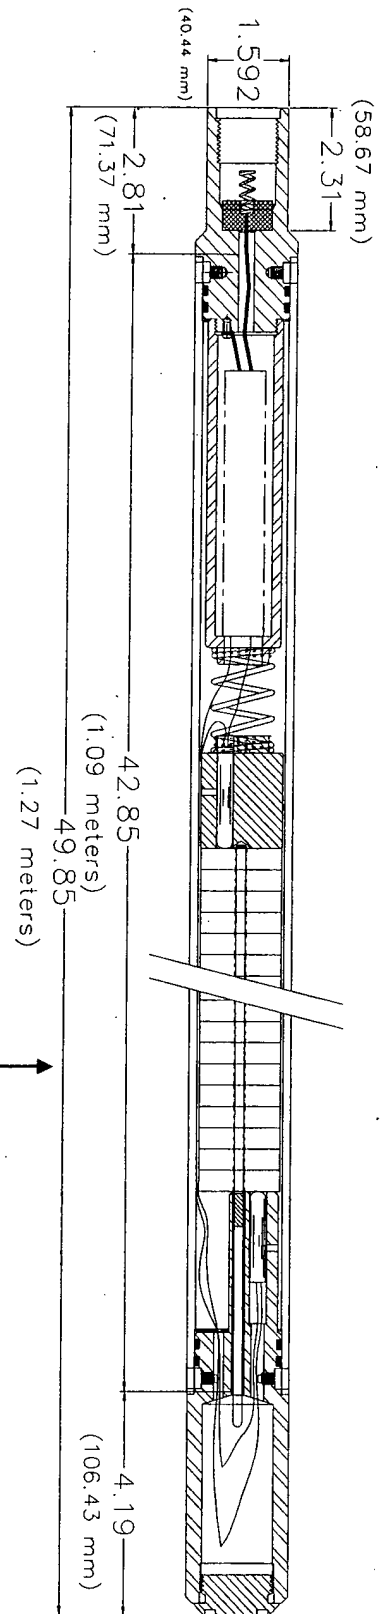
While aligning the Load Rod into the center bore of the Bottom Nose, guide excess wire into the offset bore and re-insert the Bottom Nose into the Housing. Align holes in the Bottom Nose and the Tool Housing and install Cap Screws.
